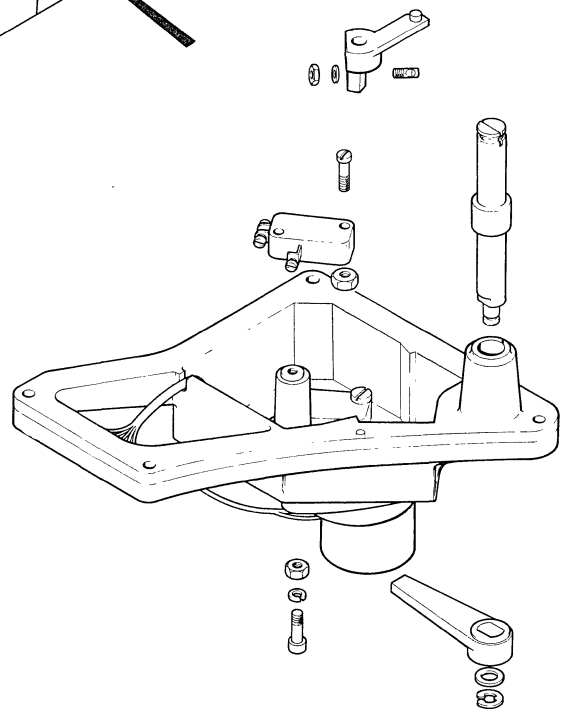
BRUSH DRIVE ASSEMBLY - 50Hz
